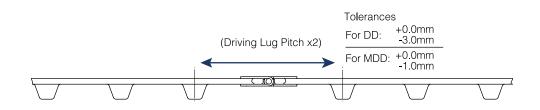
Tooth pattern after joining the DualDrive™ belt with lace
